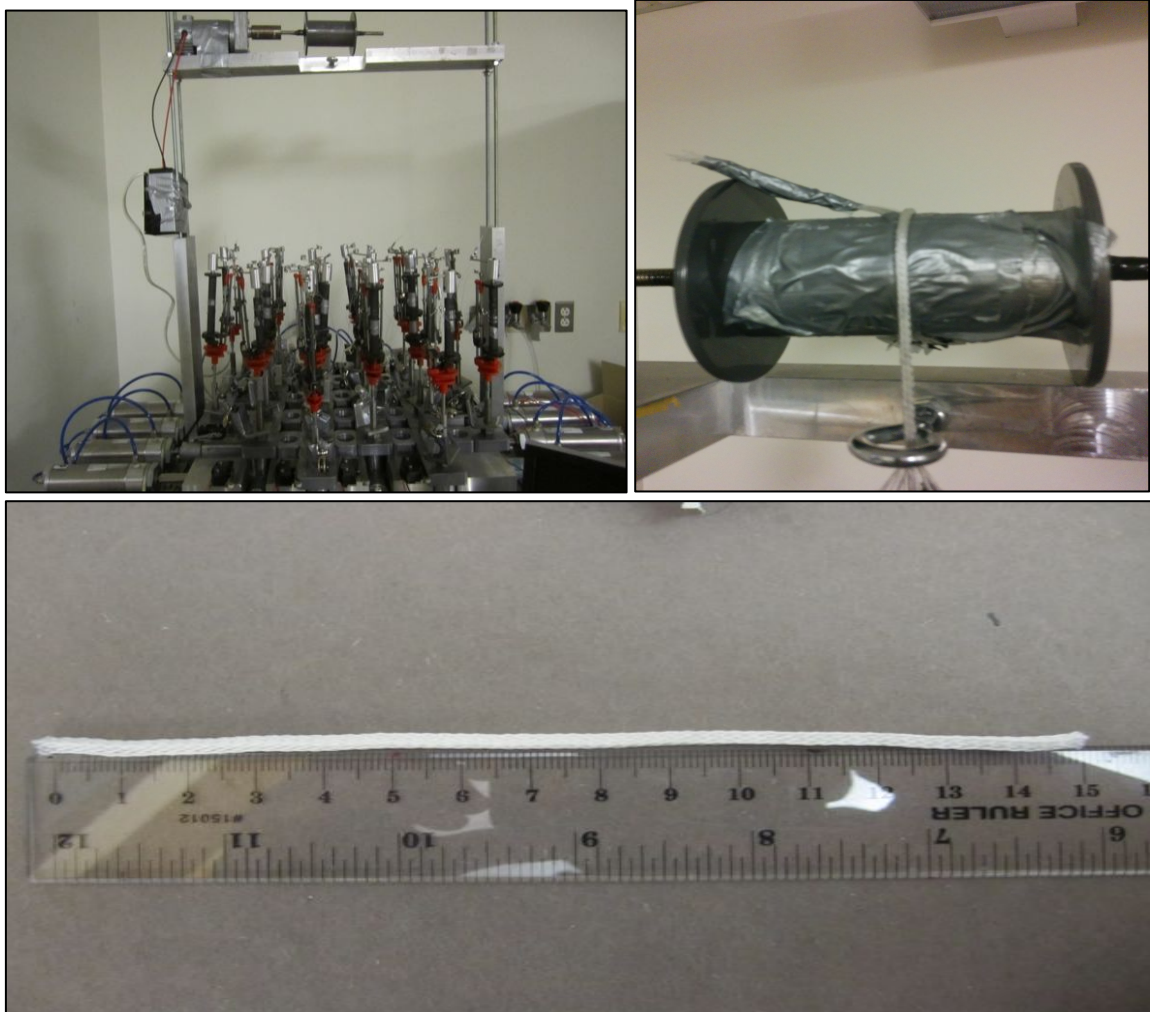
Top – Left - Image of braiding machine with alternating arrangement of yarn carrier. Top - Right – Braiding point with braid being collected on collecting spool. Bottom – Image of representative 72° scaffold
